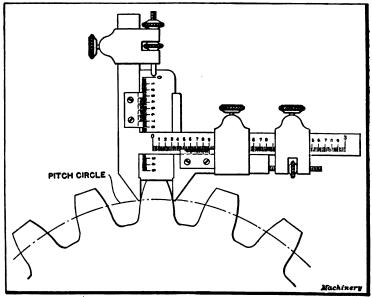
Vernier Caliper for measuring the Thickness of Gear Tooth at the Pitch Circle
